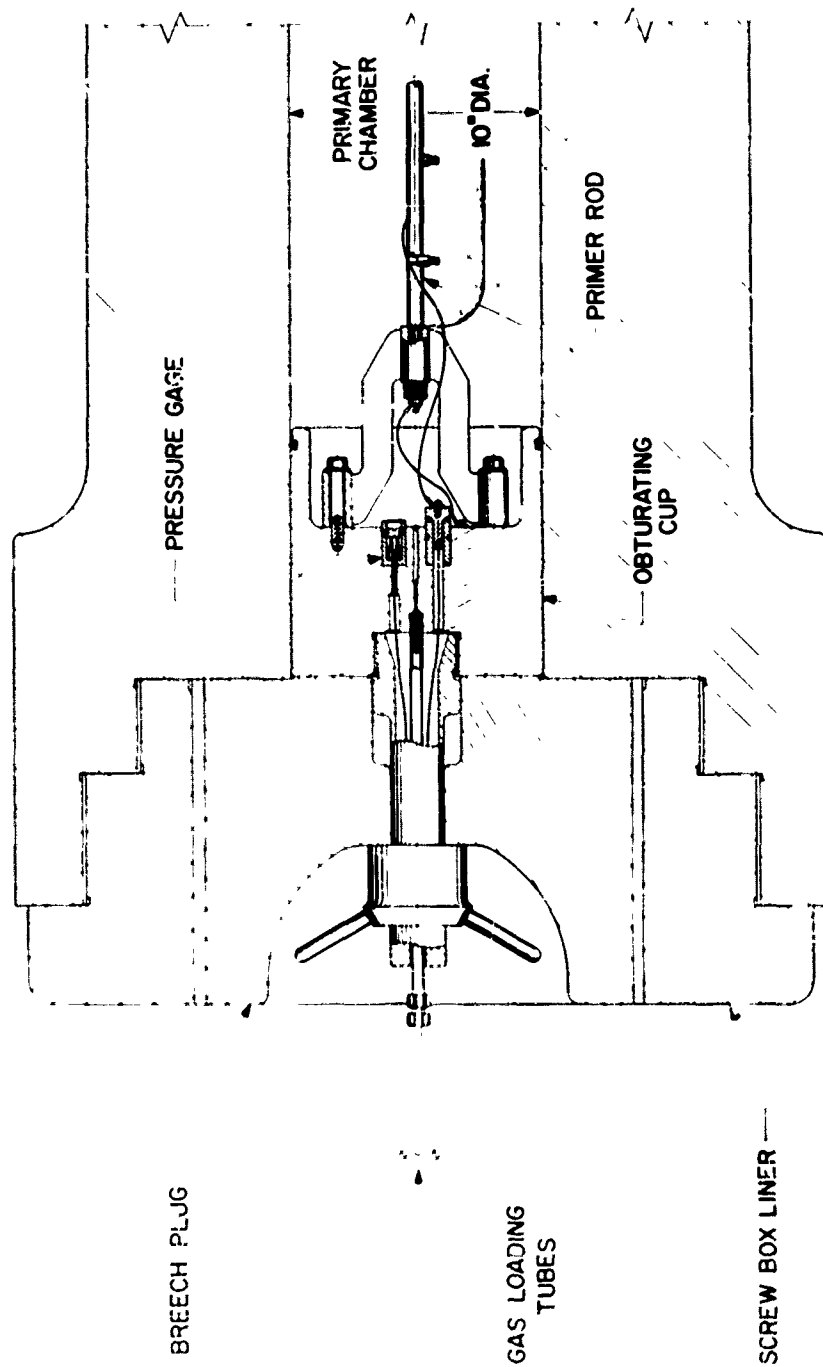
PRIMARY CHAMBER BREECH ASSEMBLY
